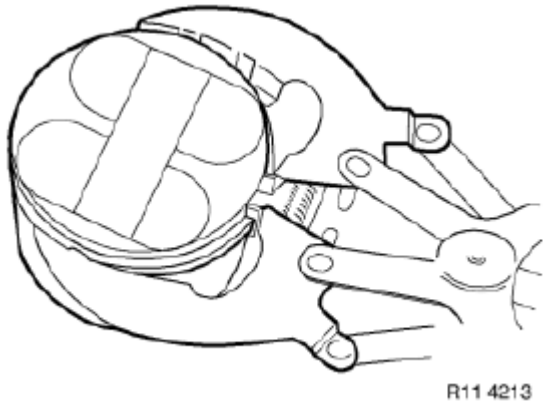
Removing Compression Ring And Stepped Ring Upwards With Piston Ring Pliers
